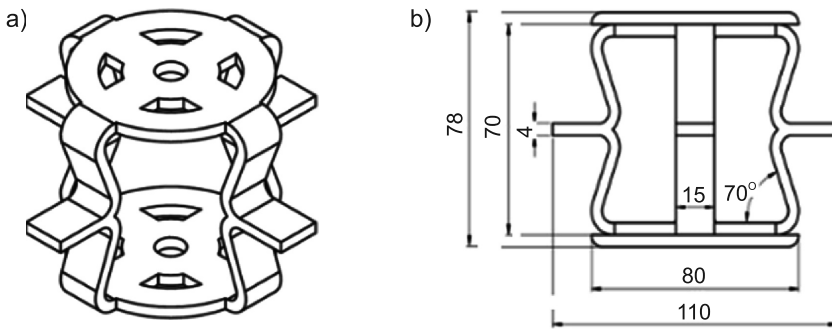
Auxetic spring: a) spring shape, b) spring (dimensions [mm])
